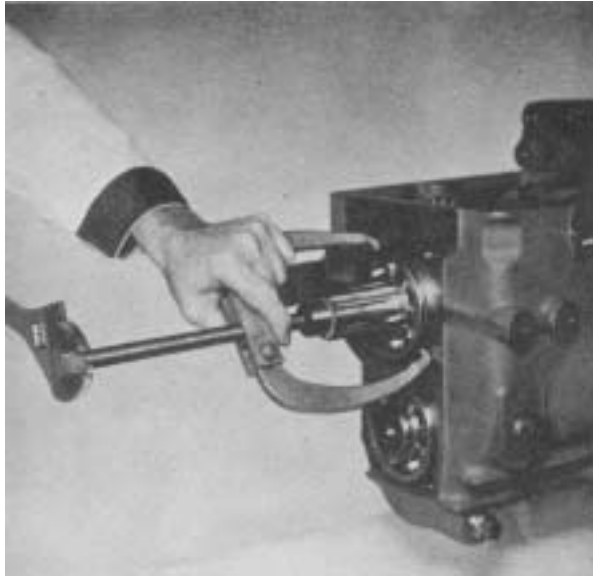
Pry mainshaft to the rear to expose rear bearing. Remove bearing.
